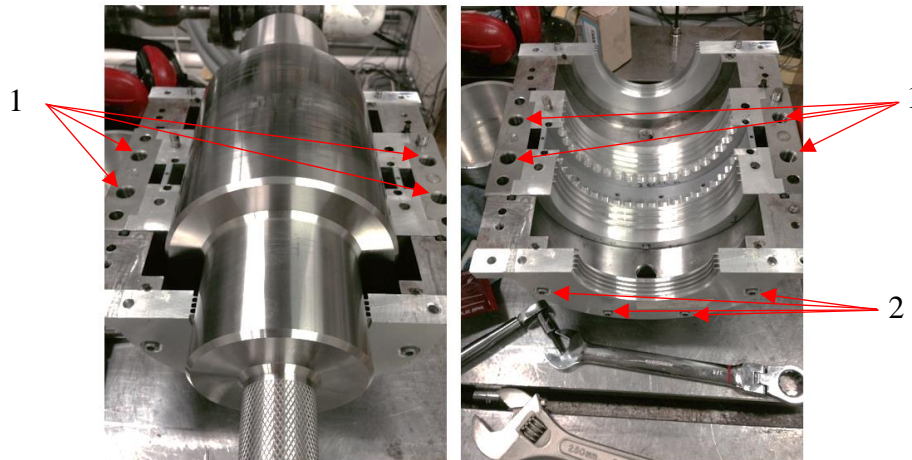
Mandrel used to align all parts of the top and bottom stator.
